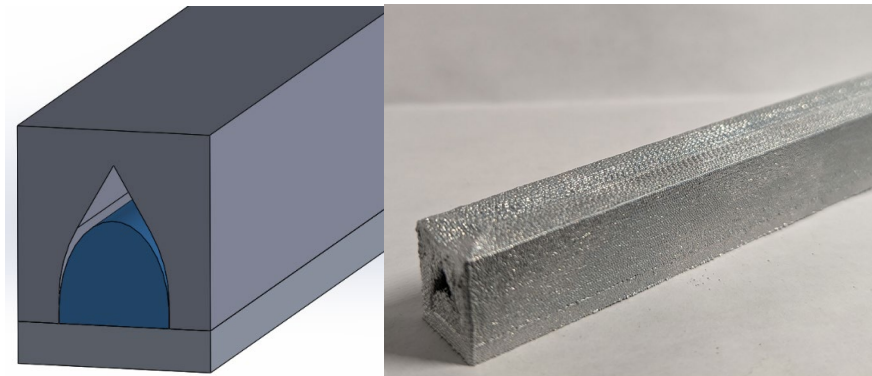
Covered Heat Pipe Design. CAD Design (Left), Printed Model (Right).
